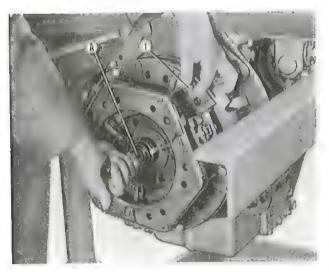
Refitting the clutch assembly to the engine flywheel.
